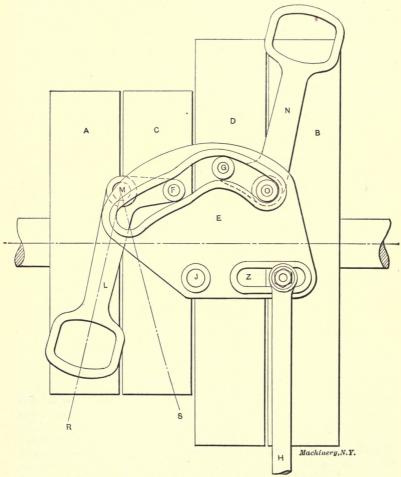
Arrangement for Automatically Shifting Planer Belts
